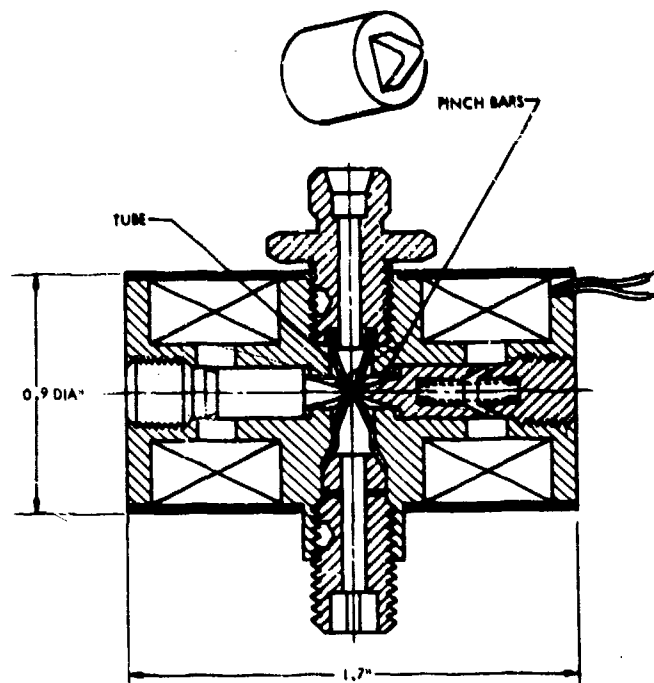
Solenoid-Actuated Pinch Valve
